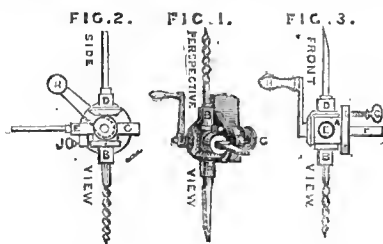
is a perspective view of the tool-holder. Figs. 2 and 3 are mechanical drawings of the same, and refer to the following description—Fig. 2 being a side view, and Fig. 3 a front view:—Imagine the tool-box A (Fig. 3) is the nave of a wheel with four arms, B, C, D, and E, all capable of being turned round on the axle F (Fig. 3), and held in desired position by spring bolt G (Fig. 3). The auger is worked by means of a handle H, which handle is also used for reversing the chisel when mortising, and is held in position by the spring bolt J (Figs. 1 and 2). To cut a mortise, the wood being fixed in the ordinary manner, B is ready for boring if required, when finished take spring bolt G in right hand and turn round D, the chisel, into position, after the mortise is cut, the core-driver E is brought into position in the same manner, and the mortise is thus finished. The several tools are brought into operation with as little trouble as a joiner experiences in shifting his mallet from his right hand to his left.
